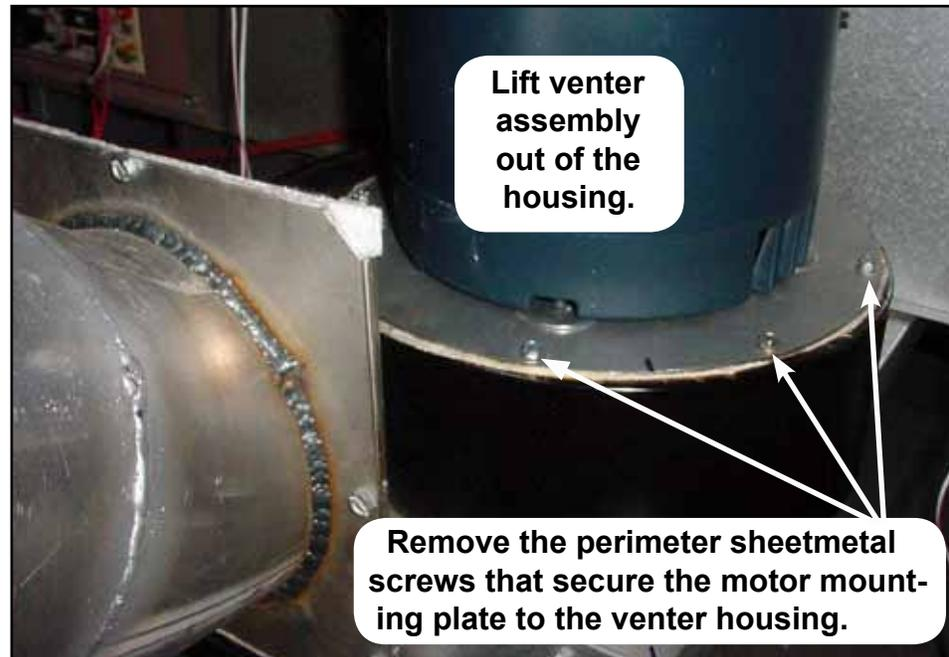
Remove the Venter Assembly before Removing the Heat Exchanger Access Panel
